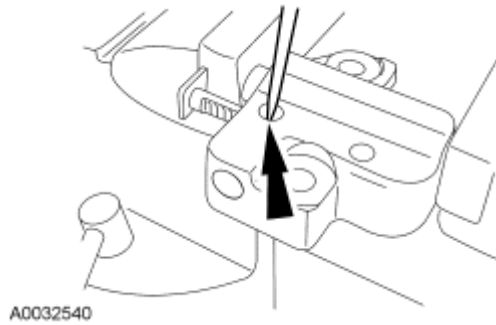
Using A Small Pick To Push Back And Hold Ratchet Mechanism
